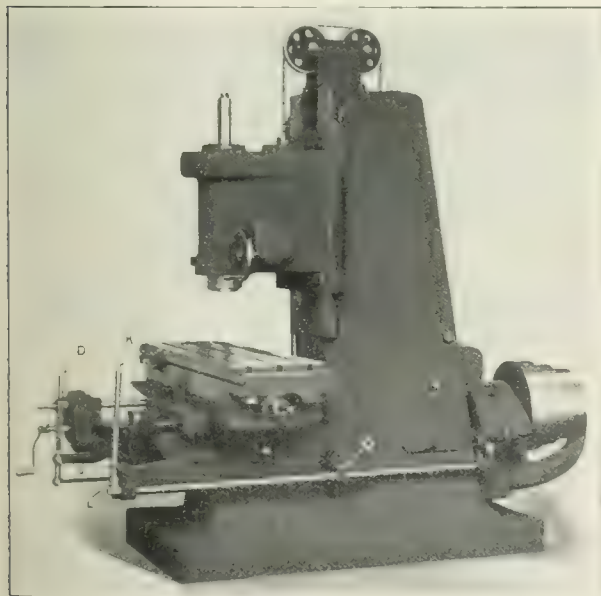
Side View, Showing the Power Quick Adjustment Mechanism.
